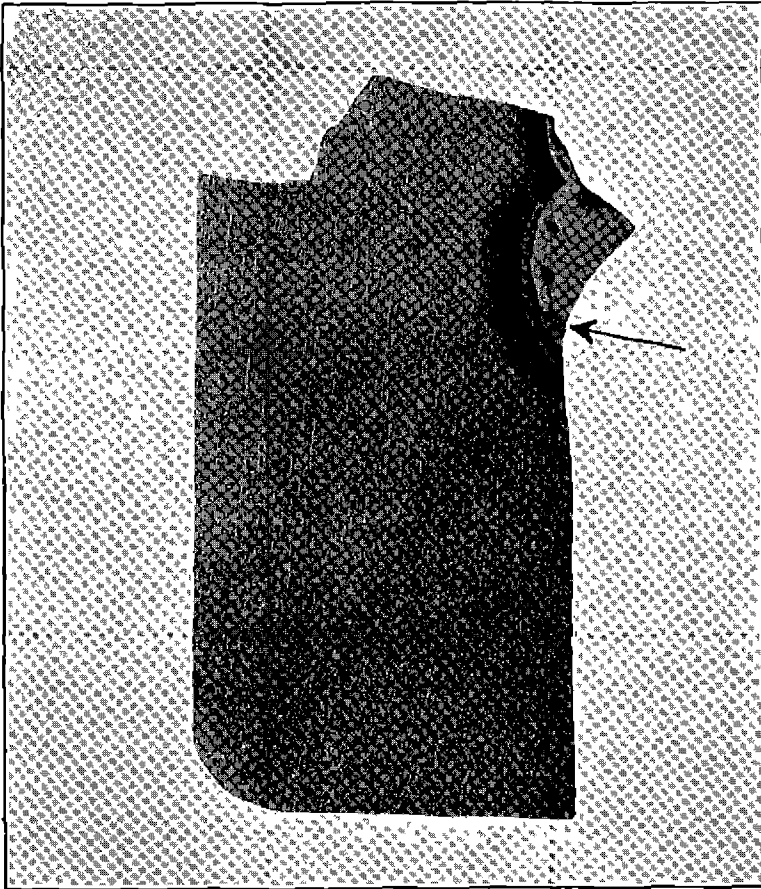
Longitudinal etching through origin of point of failure. (Referred to as photograph 1-23490)
